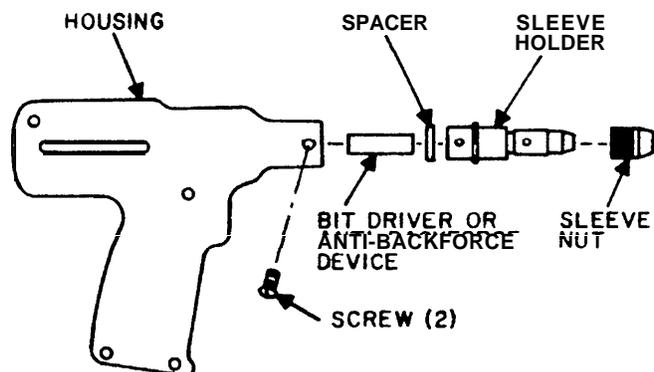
Electric Wire Wrapping Tool Disassembly For Setting Indexing Positions.
